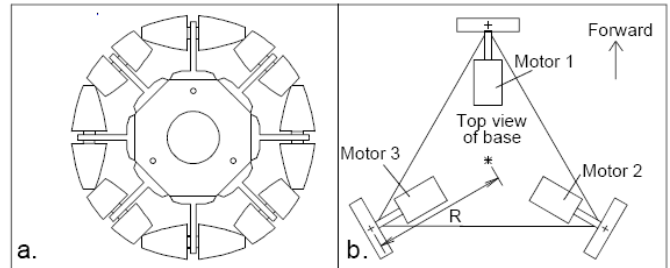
(a) Structure of Omni-directional wheel; (b) Motor layout of Robot platform
